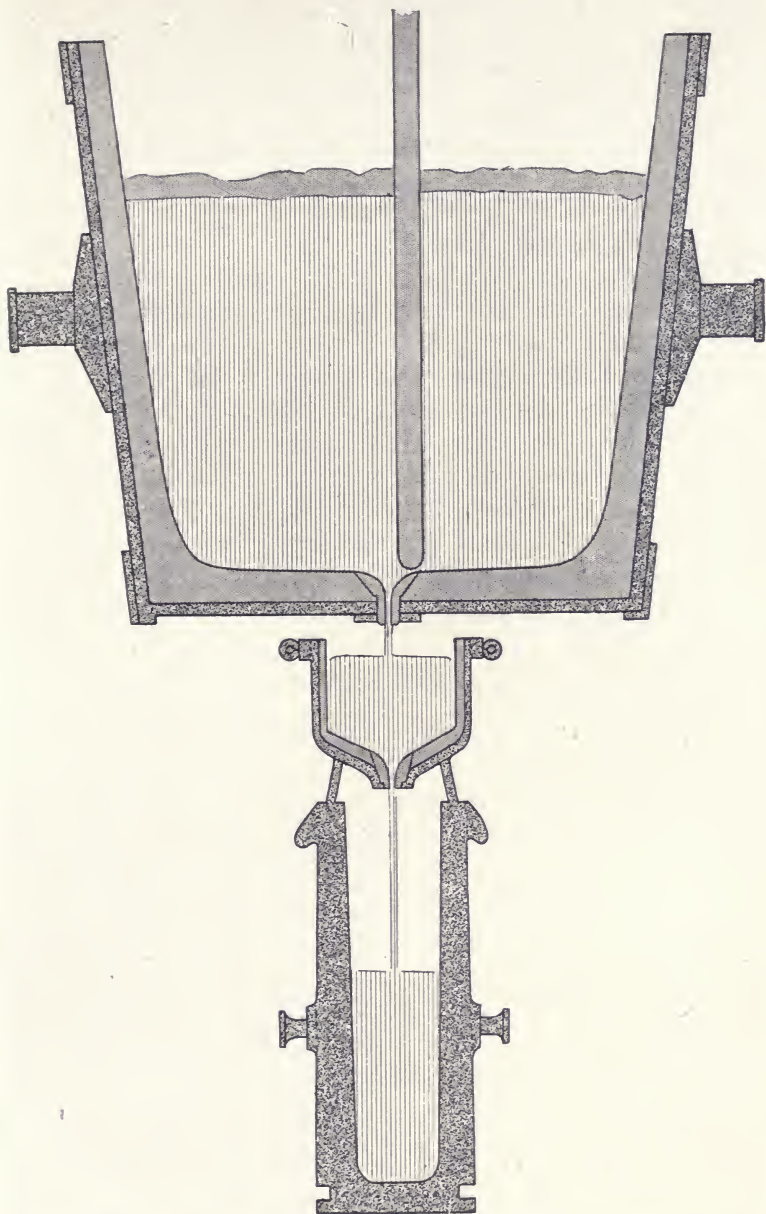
Ladle, etc., showing mode of casting. Dish may be on mould or attached to ladle.
